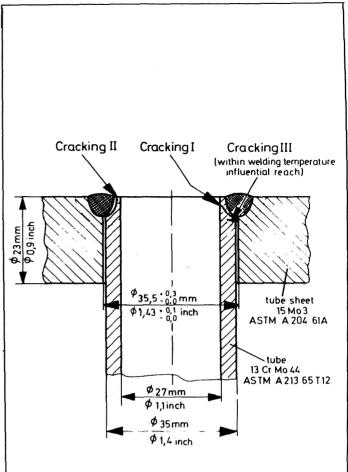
Schematic of tube welding on the methanol plant waste-heat boiler (first design).
